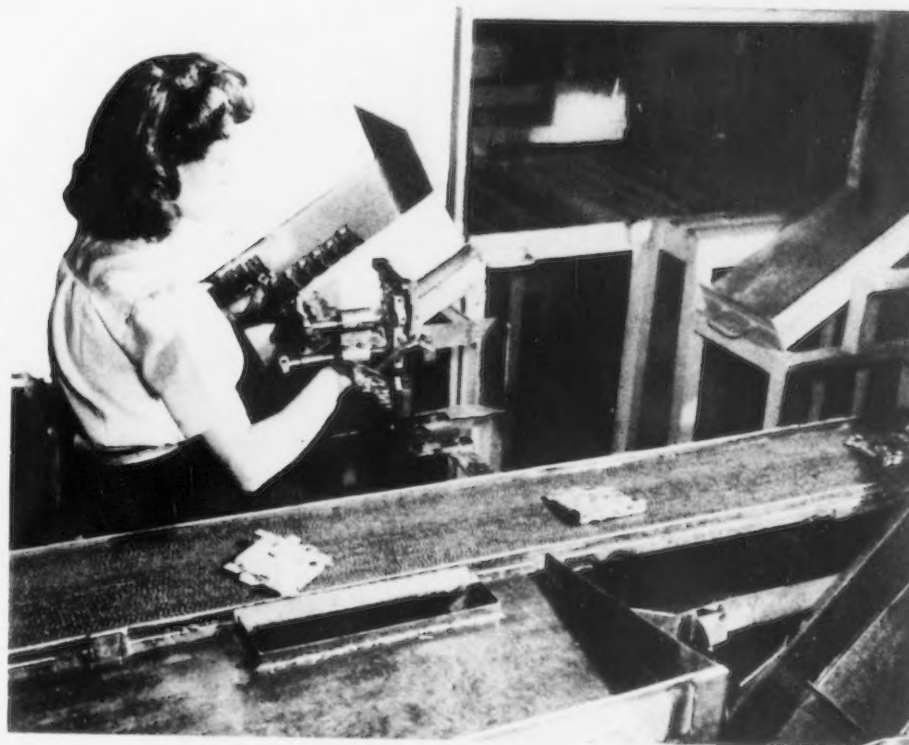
This dial setup spot welds glass-run channel retainers which are hand loaded in the air-clamping fixtures. After welding, parts are automatically ejected.
